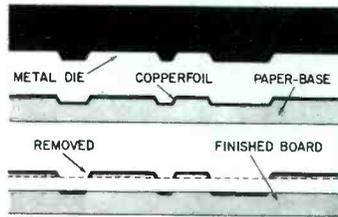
Drawing Showing Embossed Type of Printed Board and Some Production Details.
